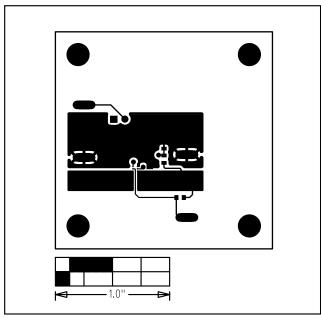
MAX1819 EV Kit PC Board Layout—Component Side
